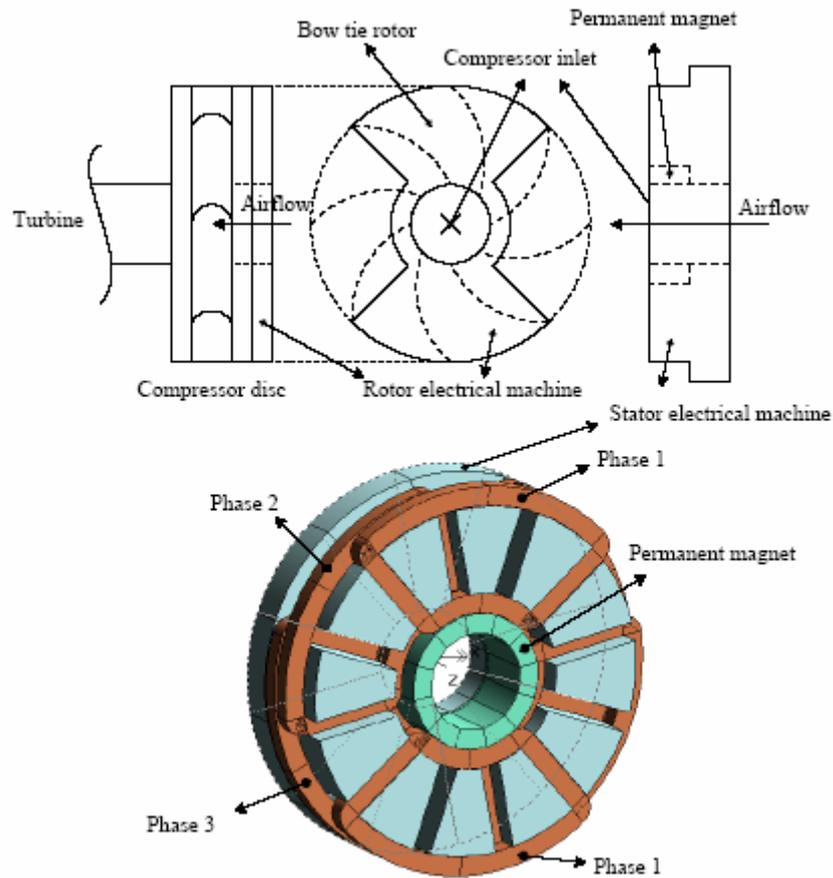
High-Speed Axial PM Machine (S. Stevens, K.U.Leuven).
